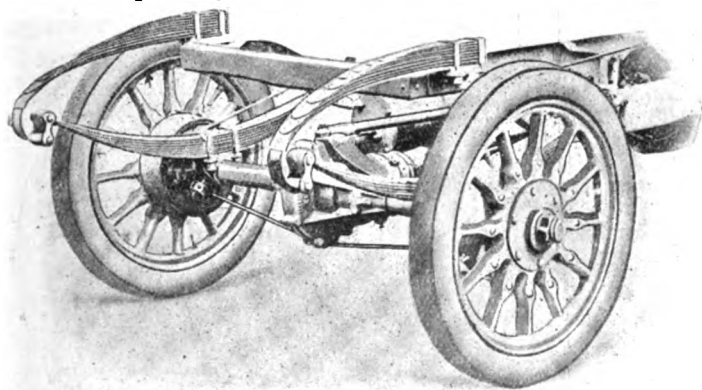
View of rear portion of chassis of Mors 15-20-h.p. car, showing the three-quarter Elliptic Springs, the strong back axle casing, and the system of bolting the springs to the axle.
